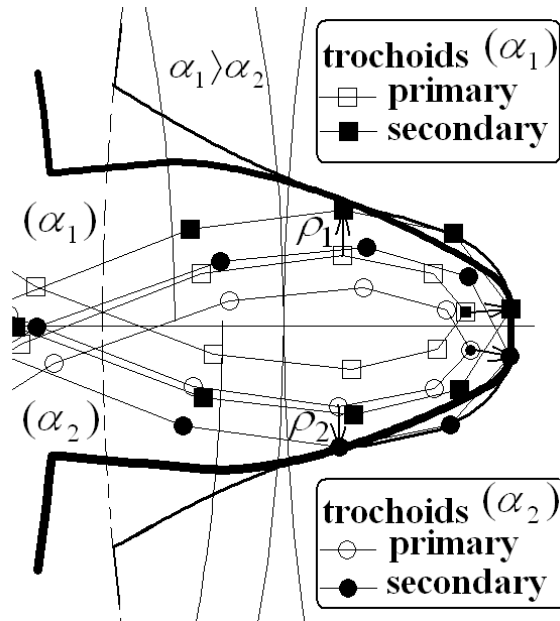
Cutter with a larger rounding radius for higher pressure angle
